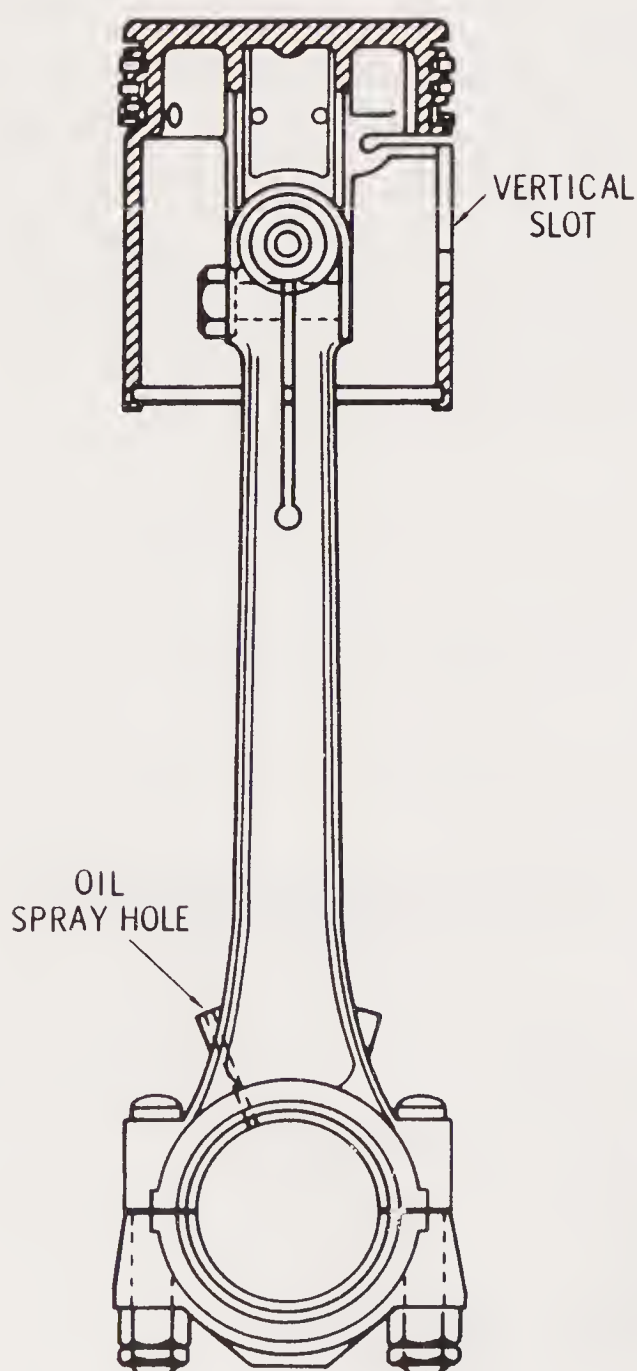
Typical heavy-duty piston and connecting rod assembly.
